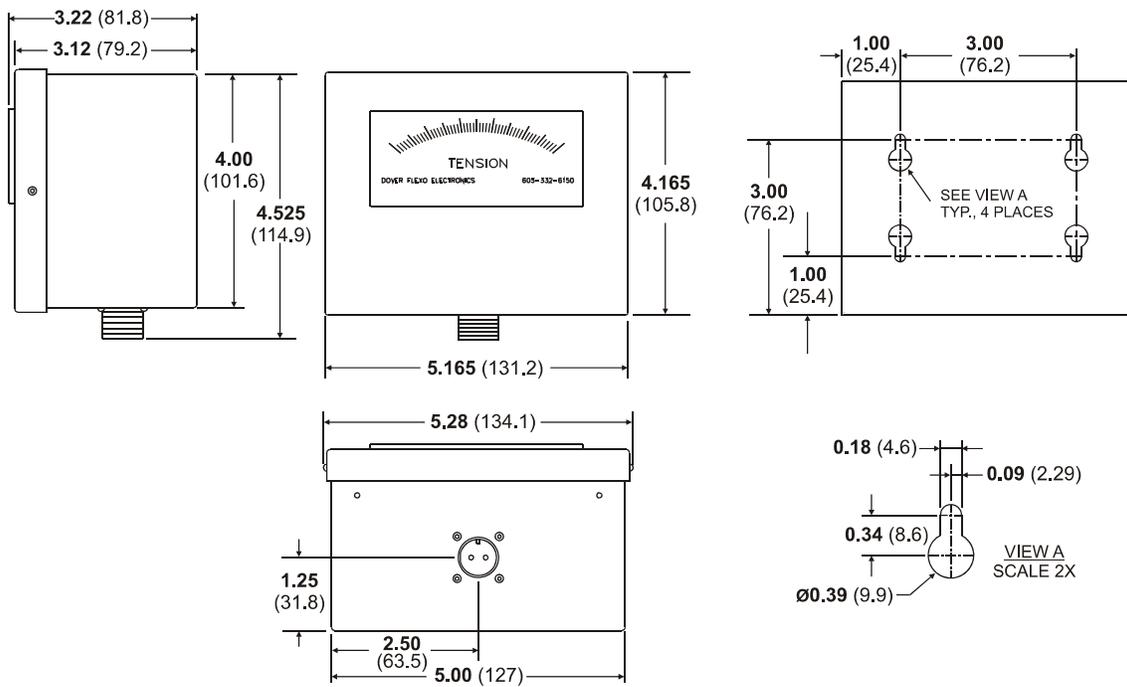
ACCESSORY TENSION METER ENCLOSURE DIMENSIONS
